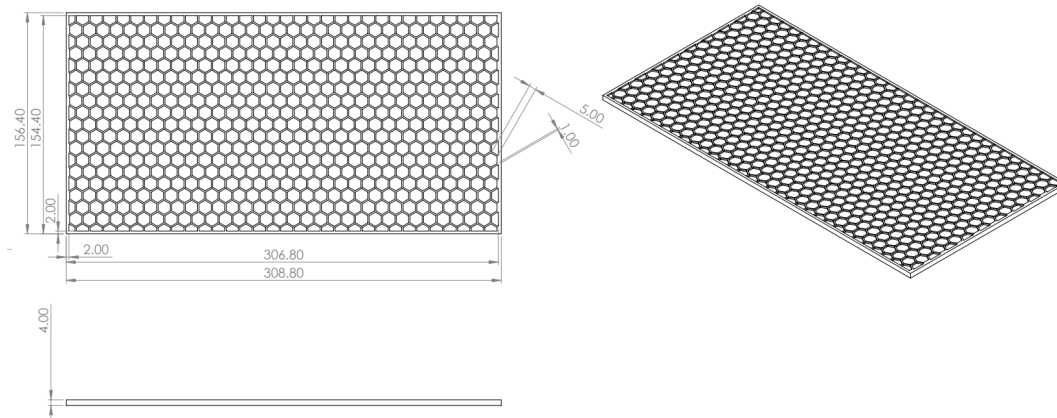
Engineering Drawing of our build design. All of the dimensions are in [mm].
